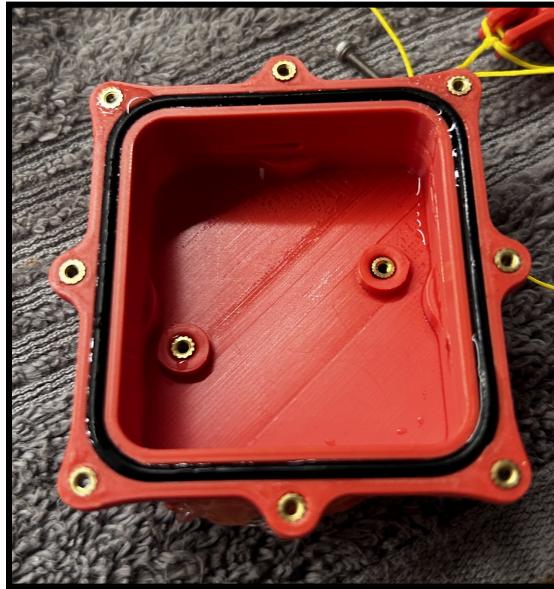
picture of assembled PCB housing prepped for second water test)
